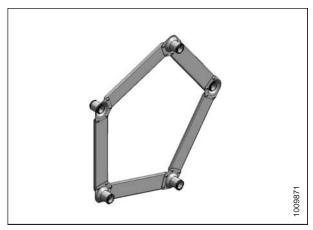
Five-Bat Reinforcing Kit Shown – Six-Bat Reinforcing Kit Similar
